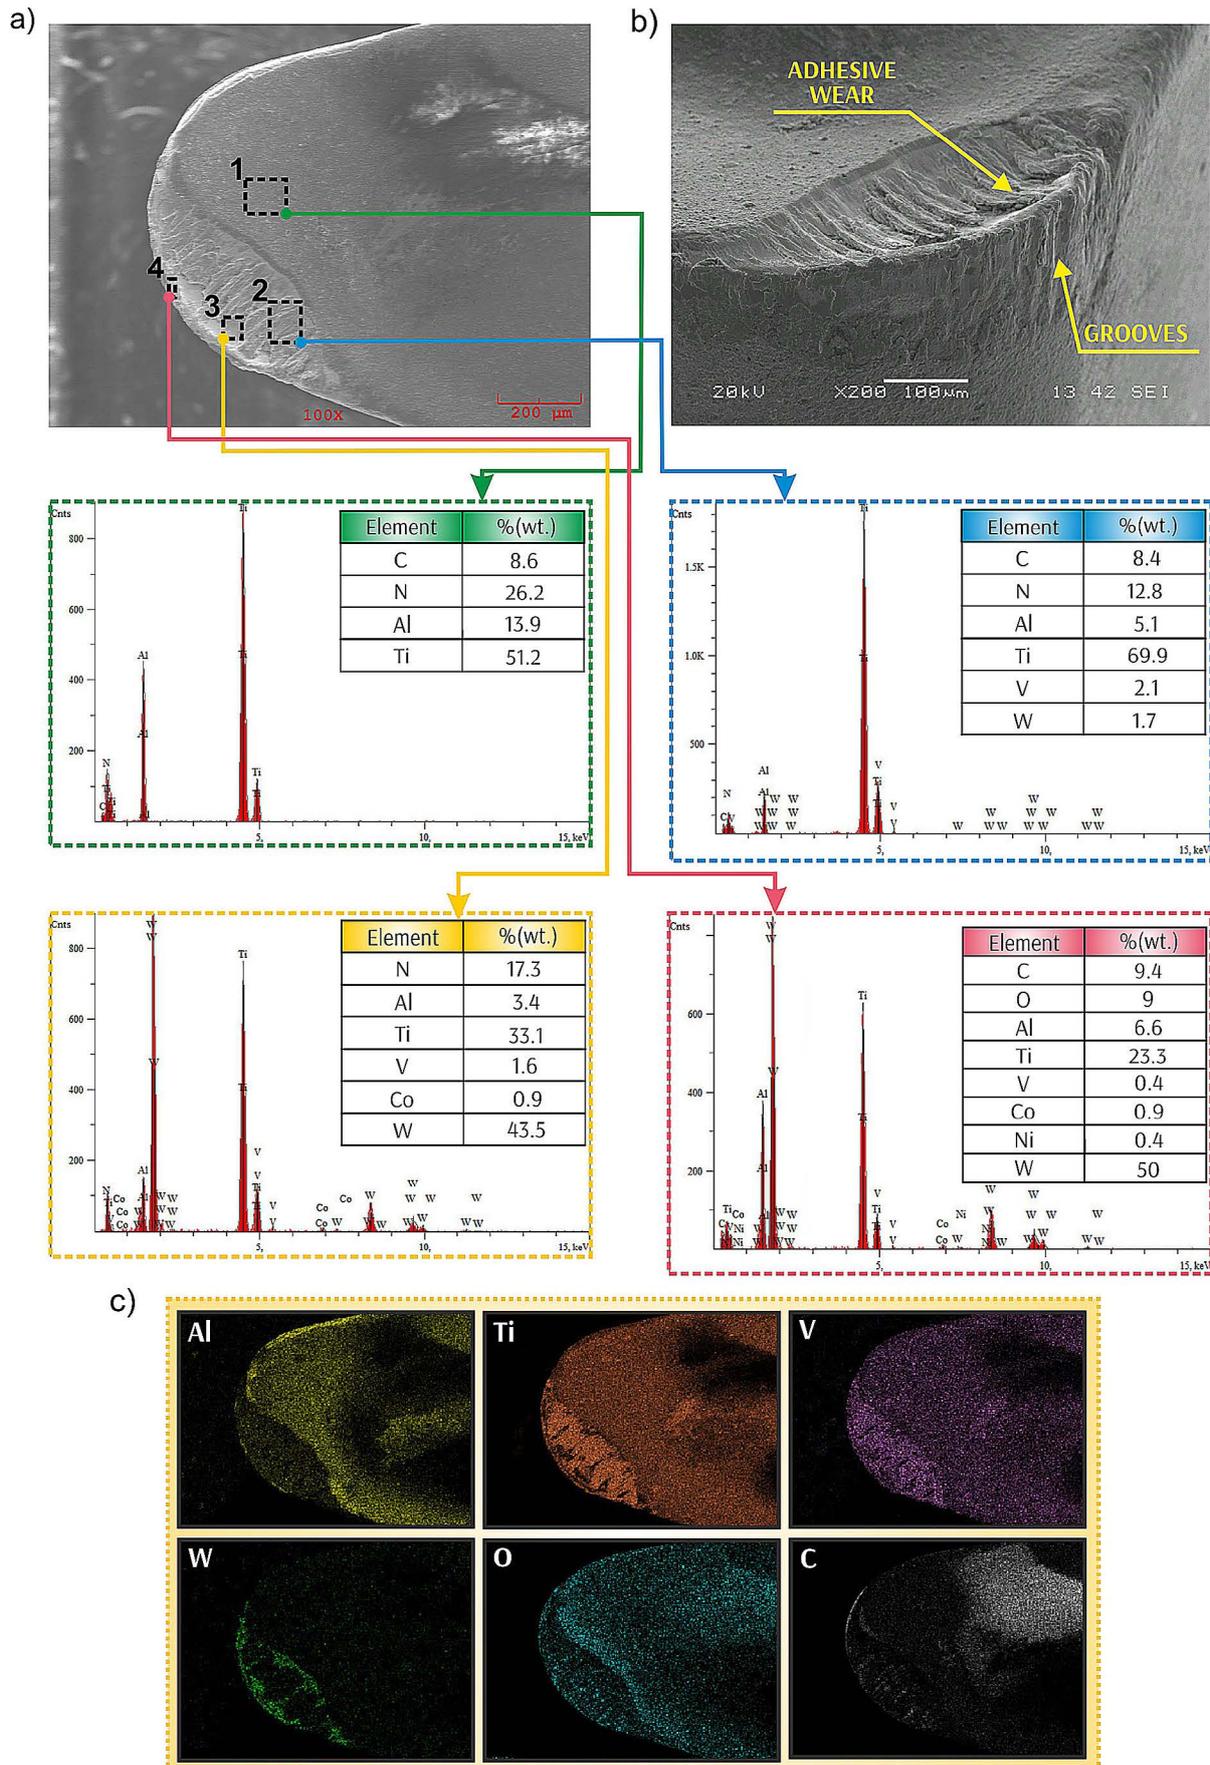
SEM of cutting tool with 0.75 wt% Al₂O₃ nanoparticles at a) Rake face (b) Flank face and (c) EDS mapping of cutting tool
